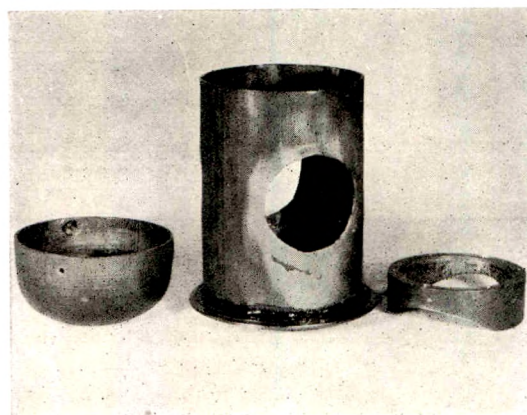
The housing with cap cut off and holes cut in the sides. The finished casting for the ground glass is seen on the right.
